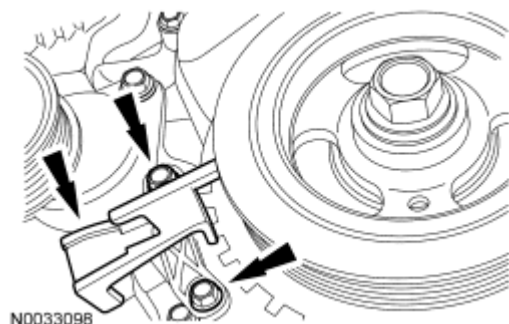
Locating CKP Sensor Alignment Tool And Bolts
